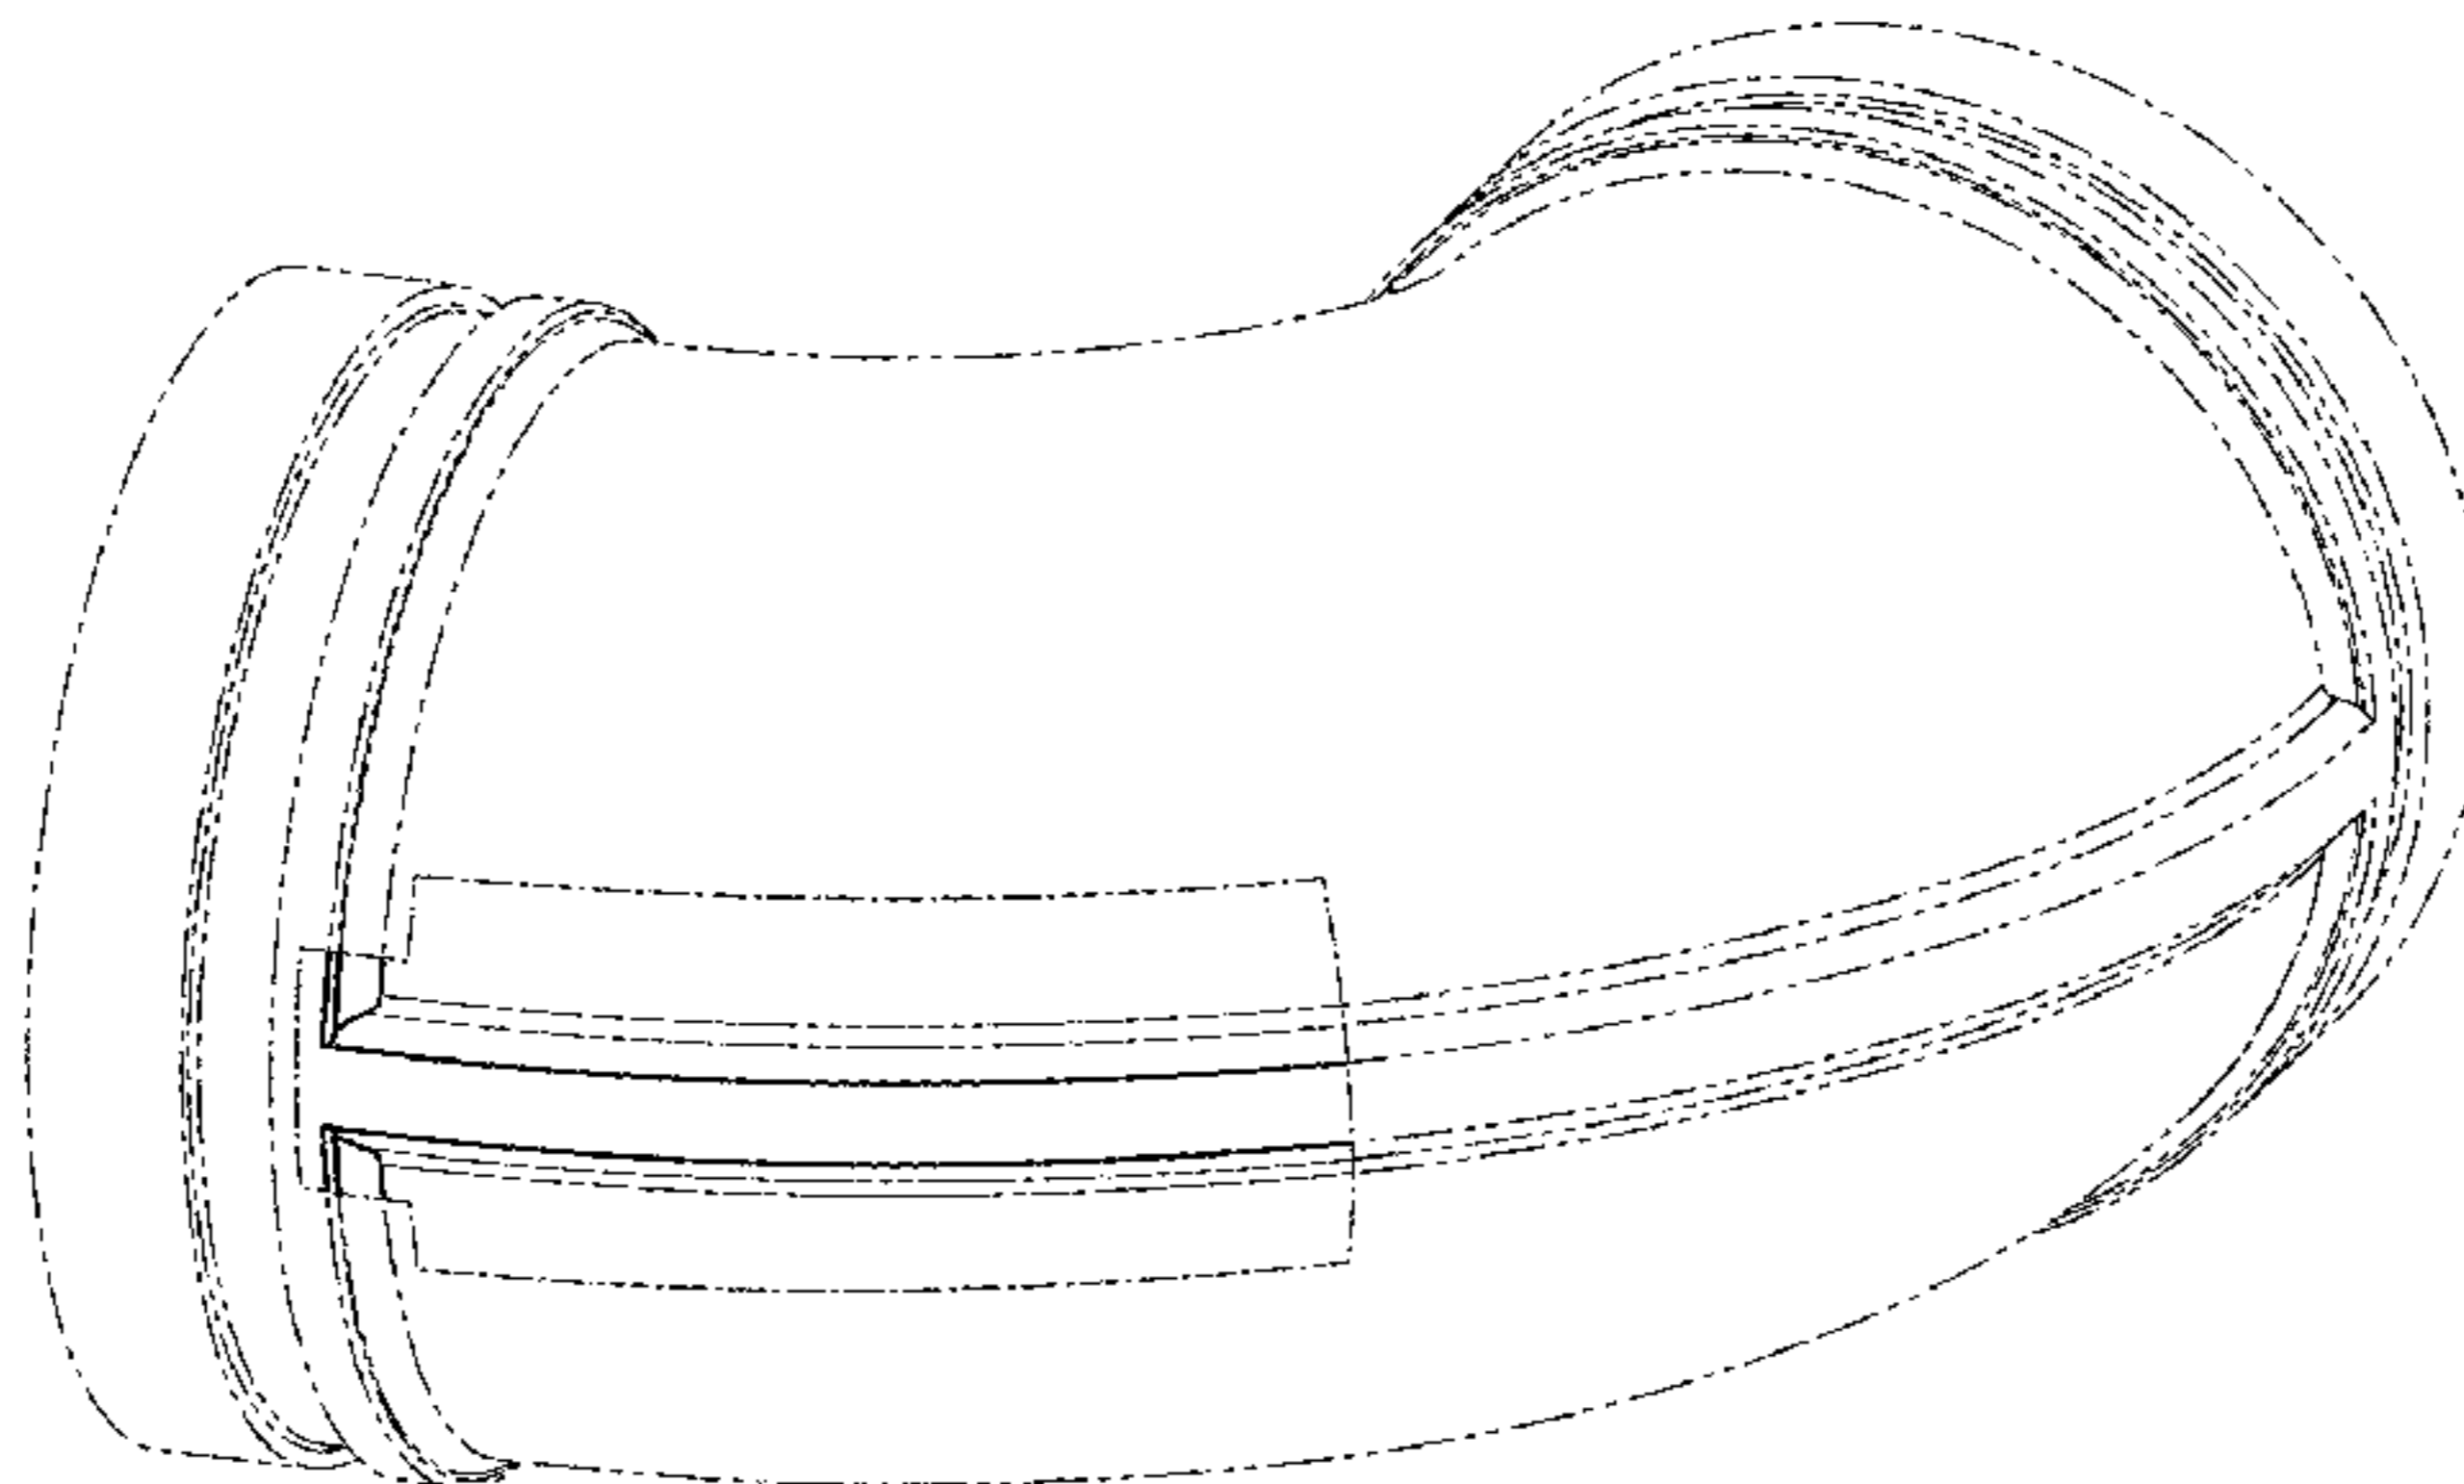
is a top perspective view showing a pipe fitting in accordance with a second embodiment of our new design.
